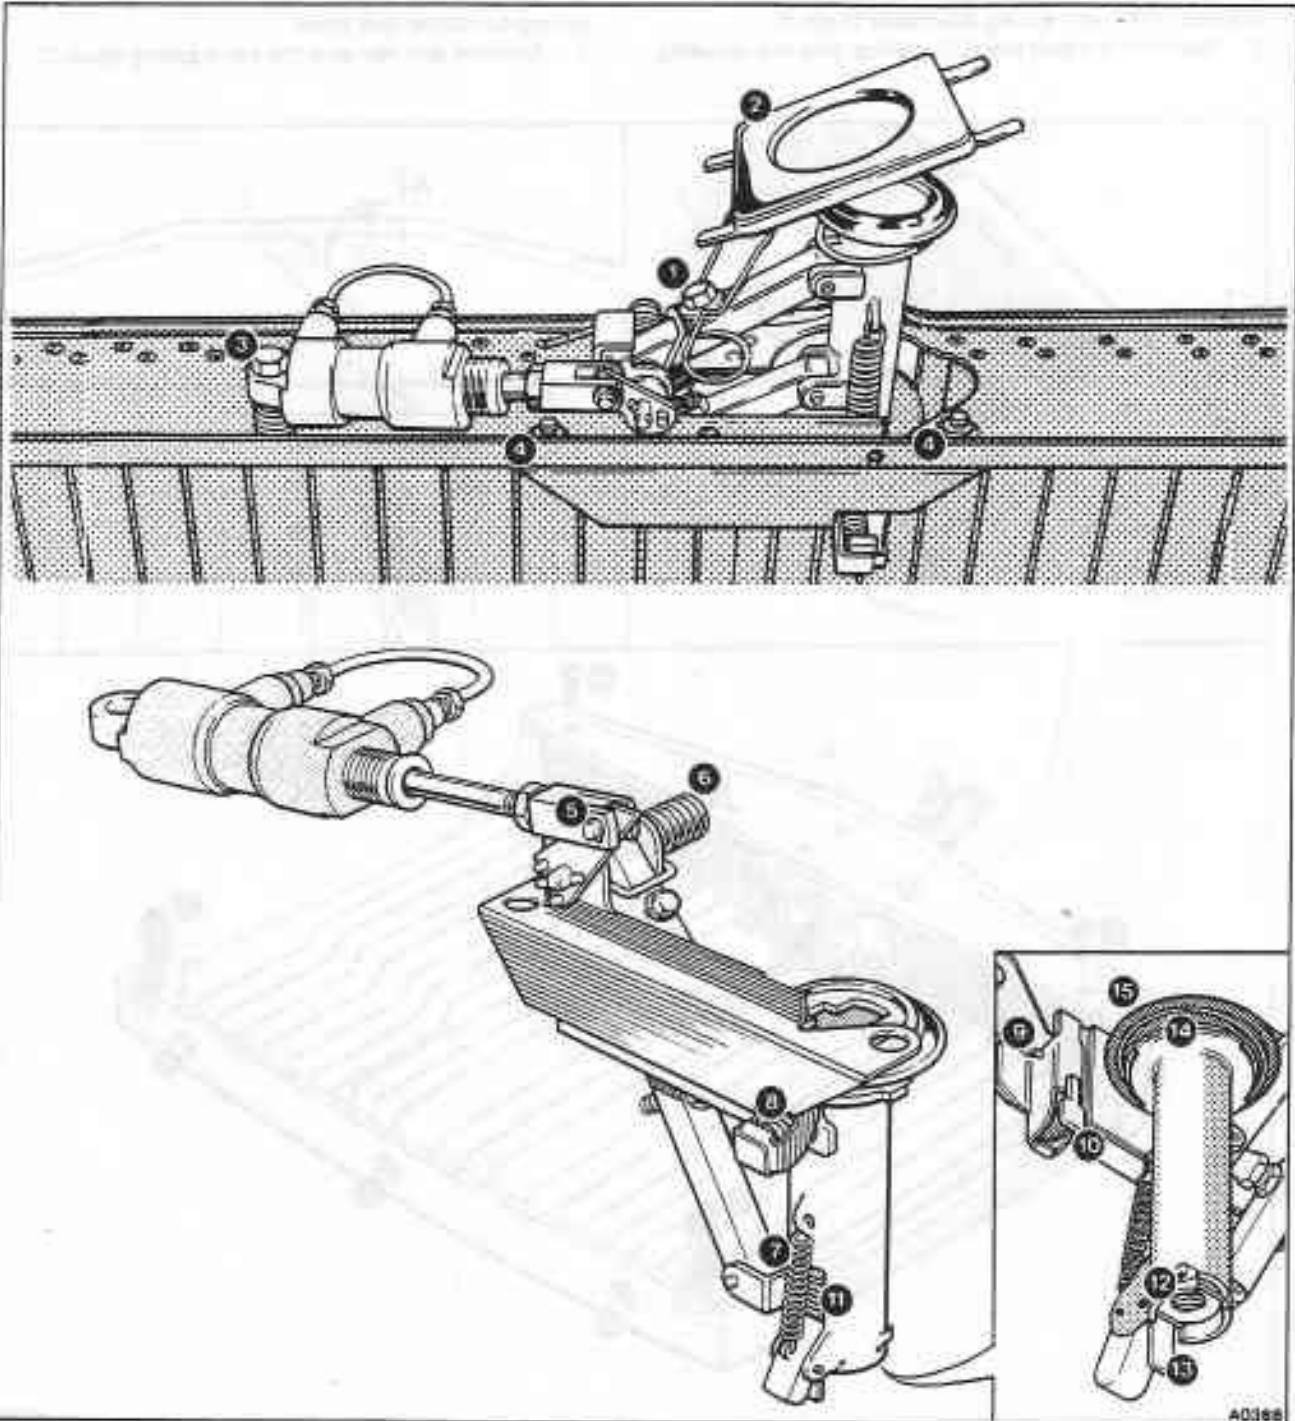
Mascot retract mechanism (hydraulic damper)
